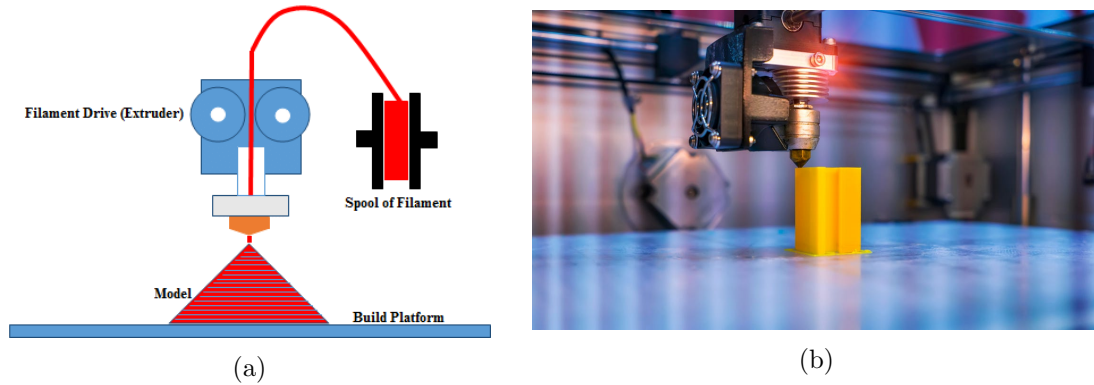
(a) 3D printing process scheme, (b) 3D printing process where appears a part of a 3D printer machine and half of a 3D printed piece.
